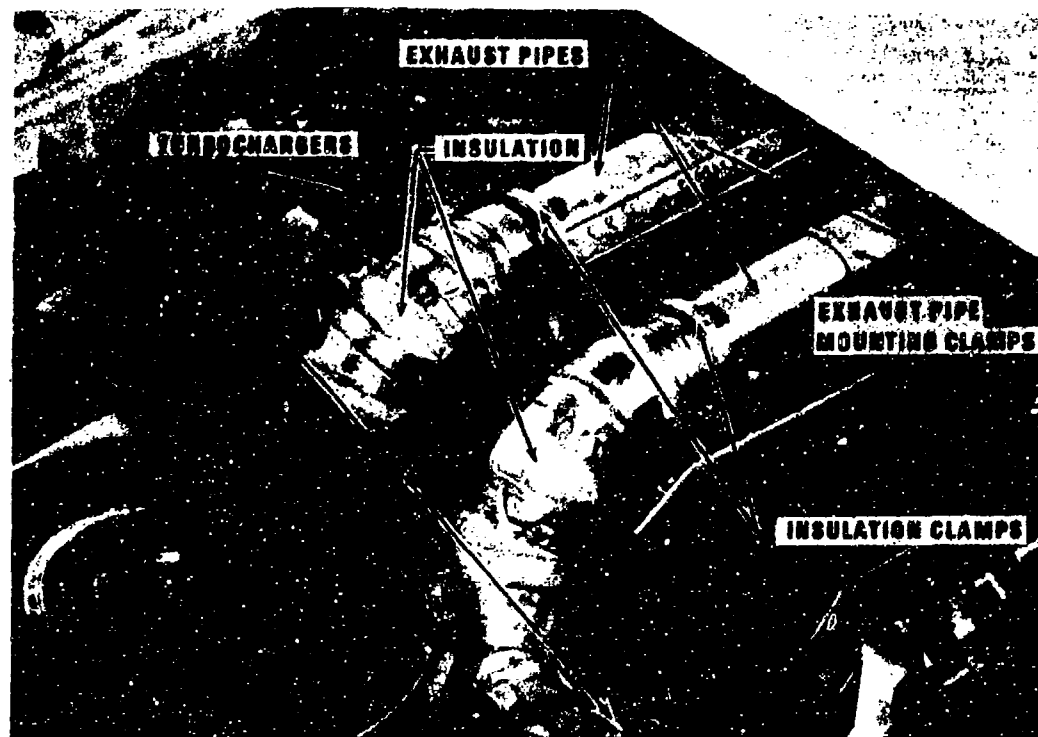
MBT70 Prototype Tank Exhaust Shields and Insulation
